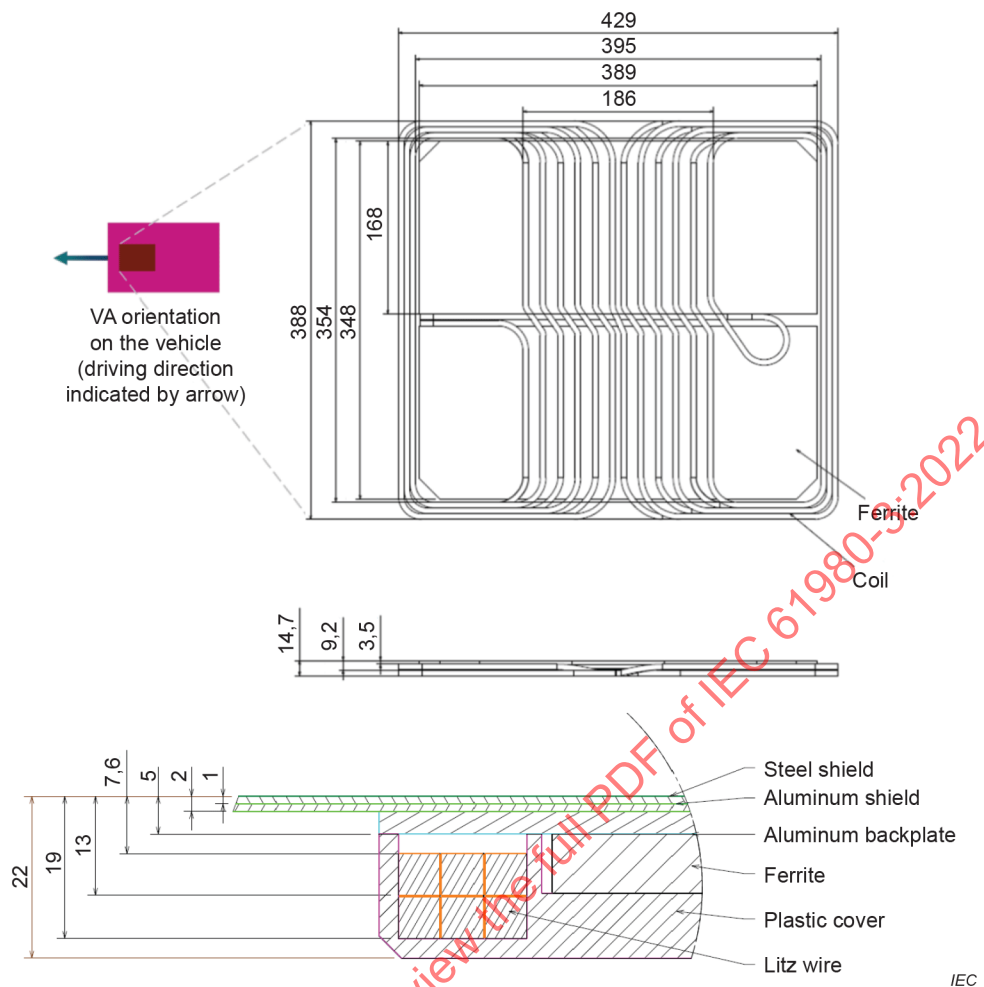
Mechanical dimensions of the MF-WPT3/Z3 DD secondary device
